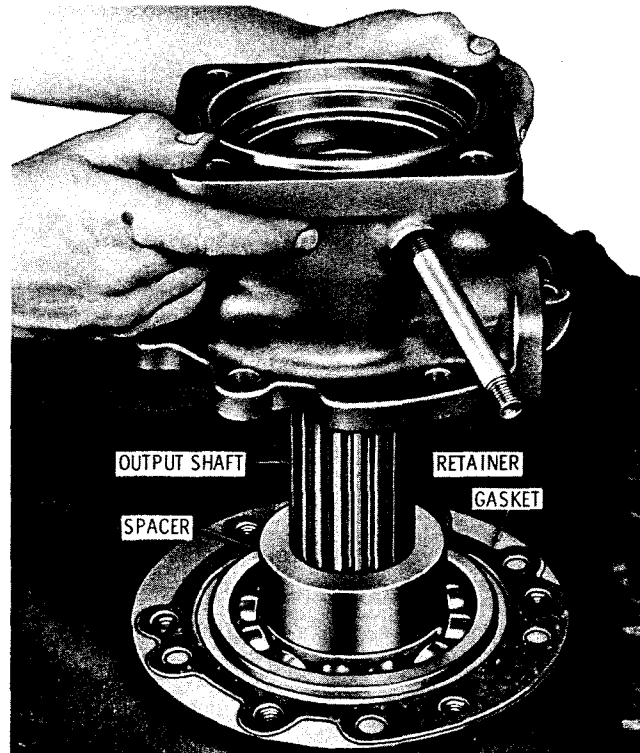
Removing rear bearing retainer (models with parking brake)
